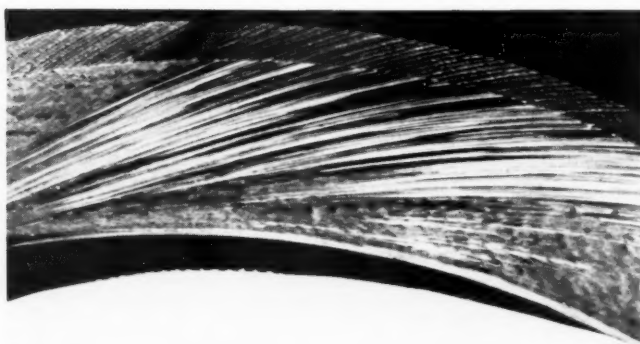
Failed pinion gear tooth surface due to ridging — High Torque-Low Speed Axle Test.
